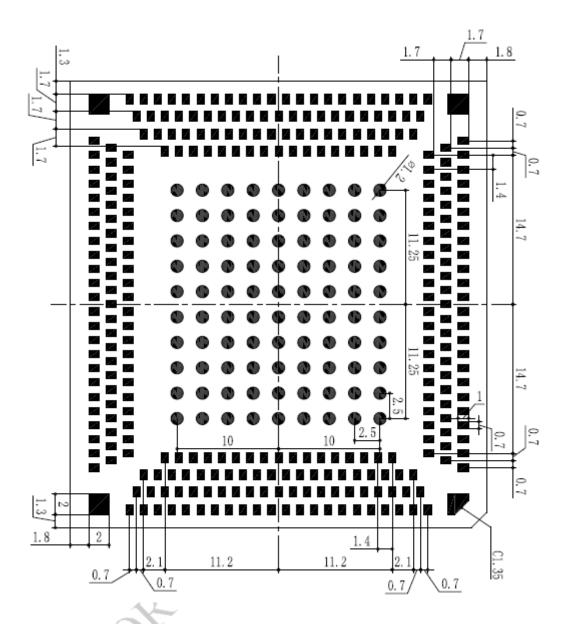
5G S-Module Basic Type-L Pin Size (Layout-1 and Layout-2)
